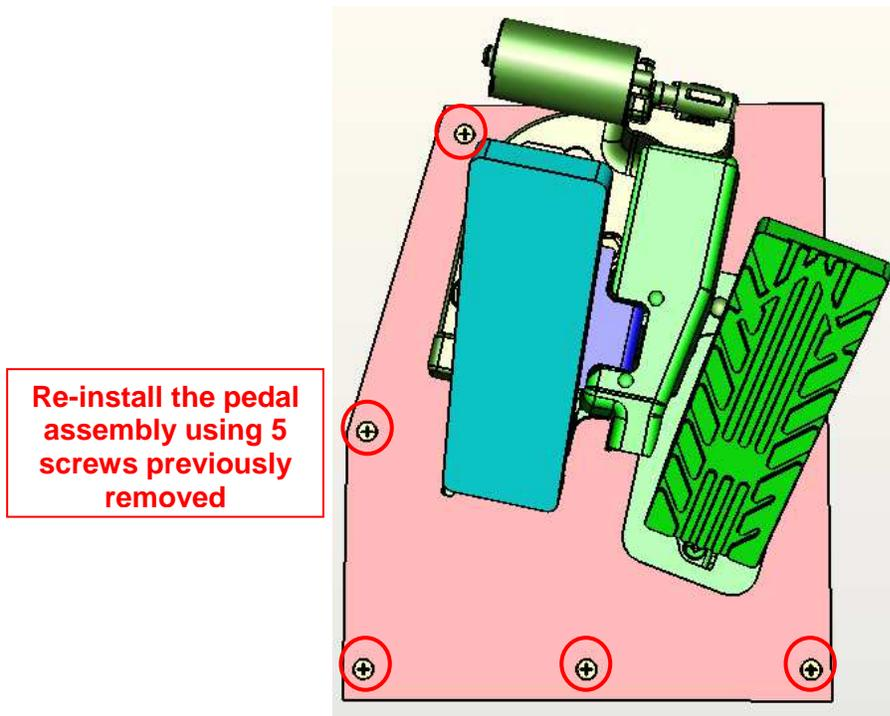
Re-install Brake/Accelerator Treadle Assembly
